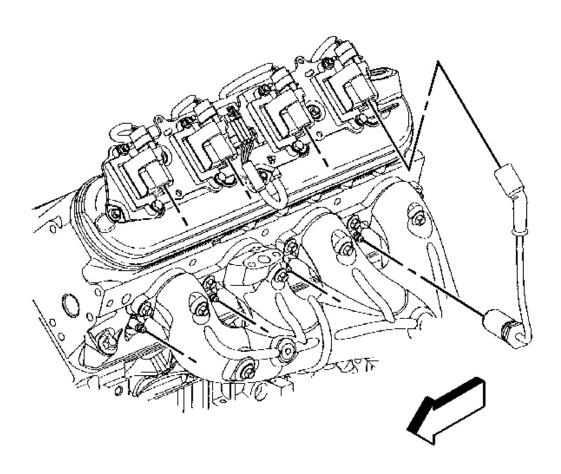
View Of Spark Plug Wire & Boot Courtesy of GENERAL MOTORS CORP.
